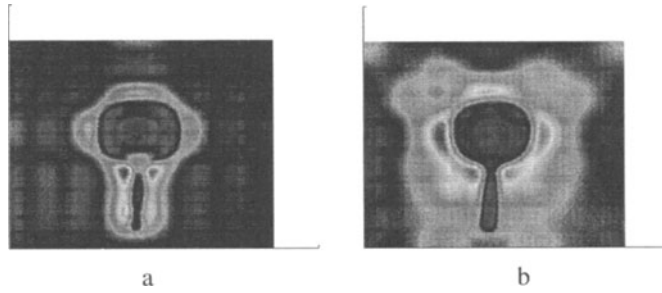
Fusion results for single rivet for a) 6 blocks, b) 12 blocks.
